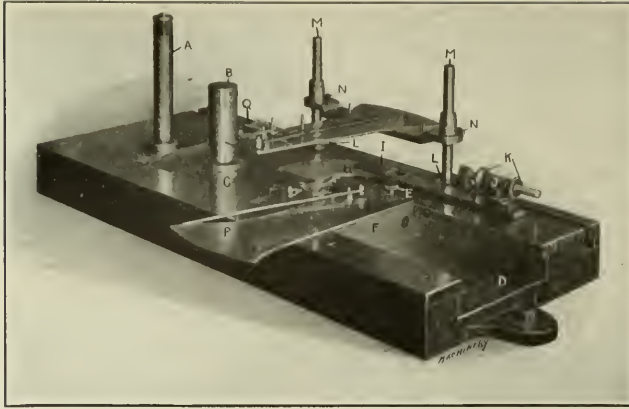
Device for testing Pitch Diameter, Concentricity of Bearings, Tooth Thickness at Pitch Line and Parallelism of Teeth with Axis of Gear
